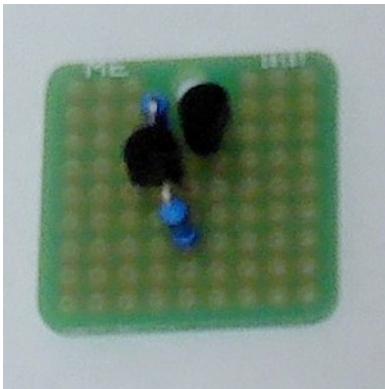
Prototyping board and one possible pump control circuit layout.
